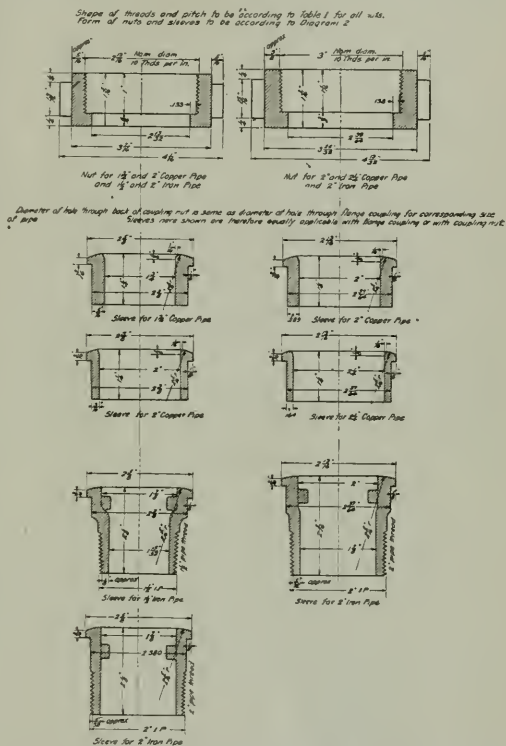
Proposed Standard Dimensions of Injector Coupling Nuts and Sleeves
